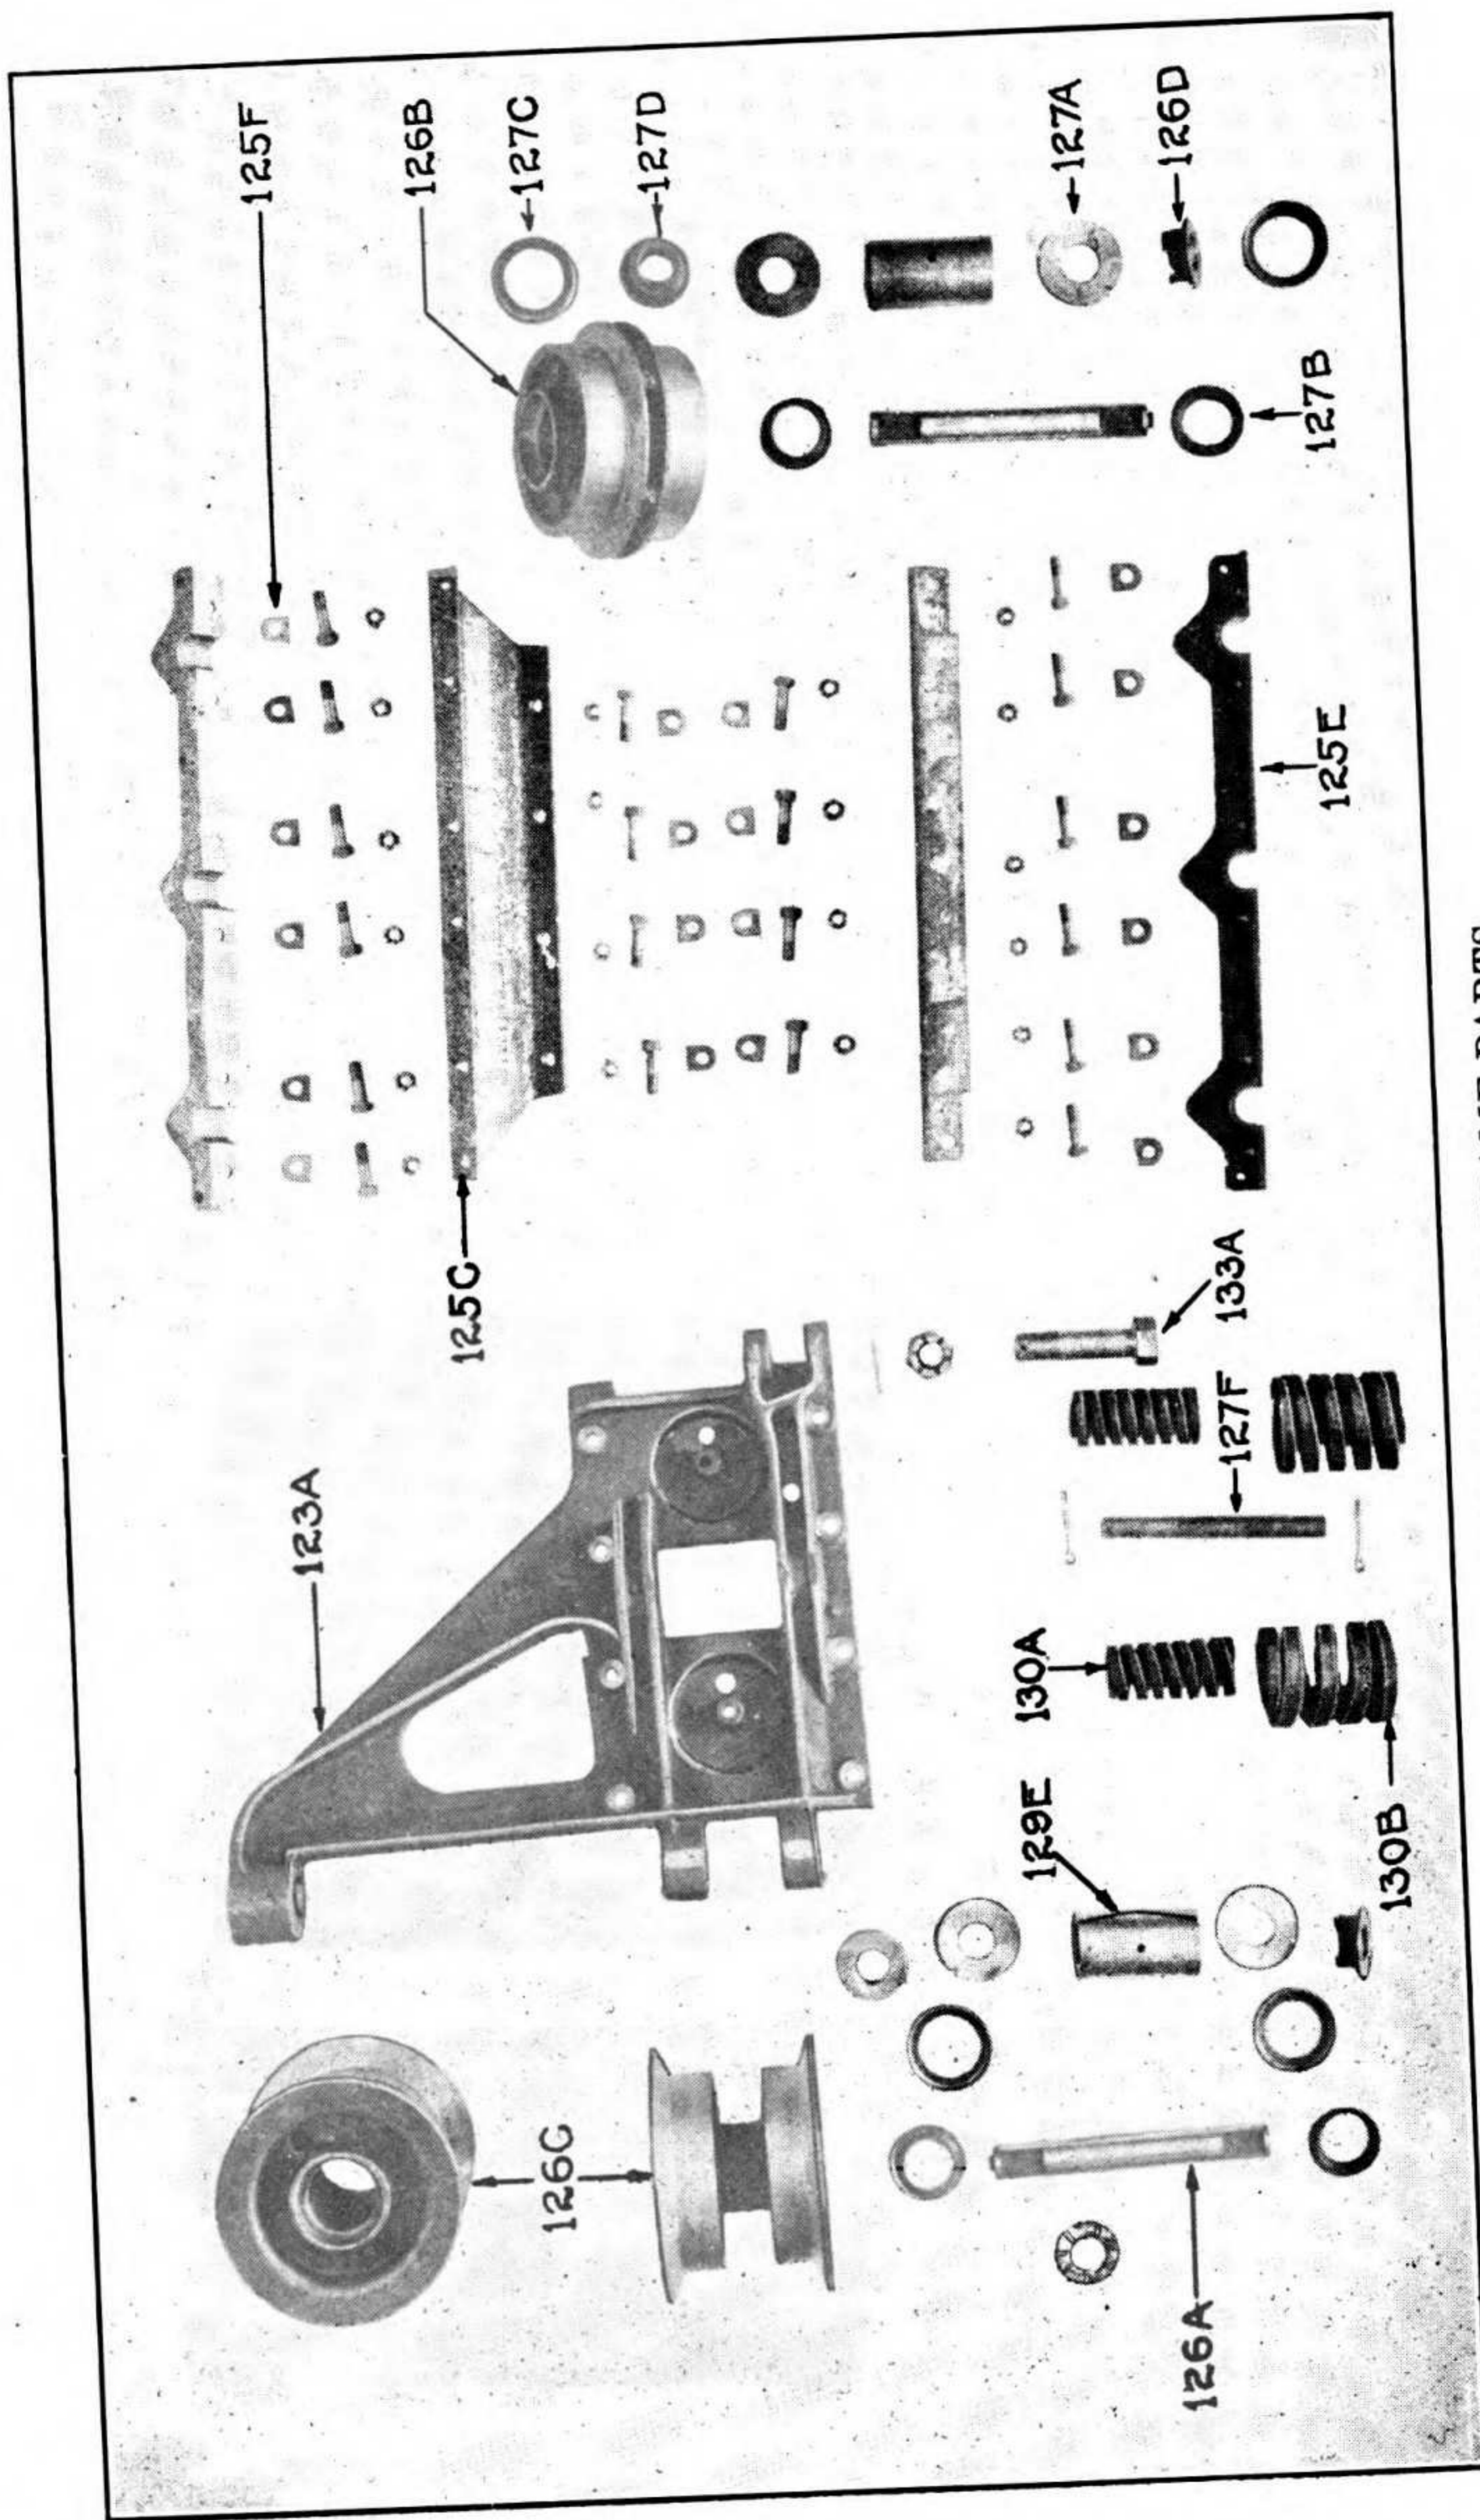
FRONT ROLLER FRAME ASSEMBLY
